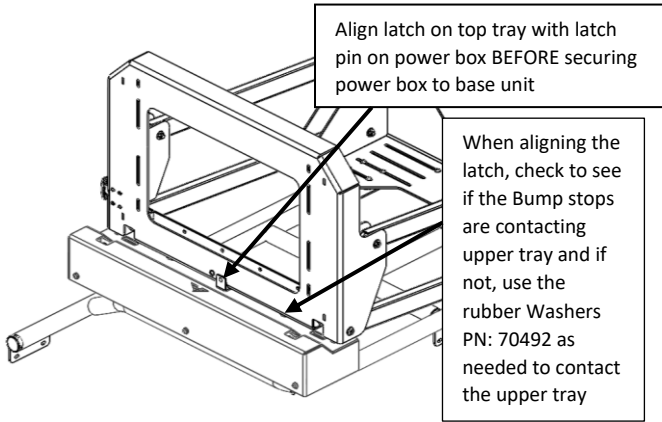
Aligning Power Box Enclosure with Lower Lift Assembly
